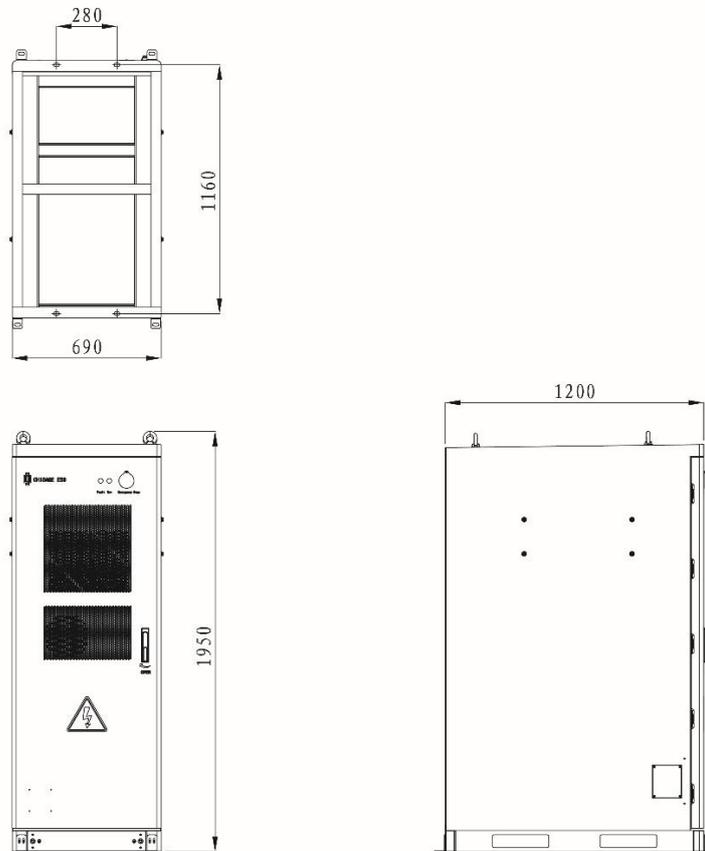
OBE47/54/62/70 Rechargeable Li-ion Battery System dimension drawing-1
